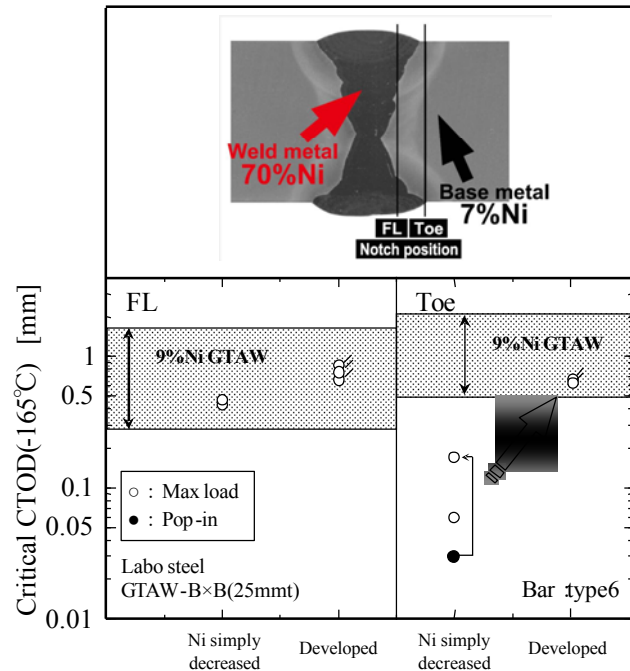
Improvement of CTOD property in welded joint by decrease of Si and Cr bearing
